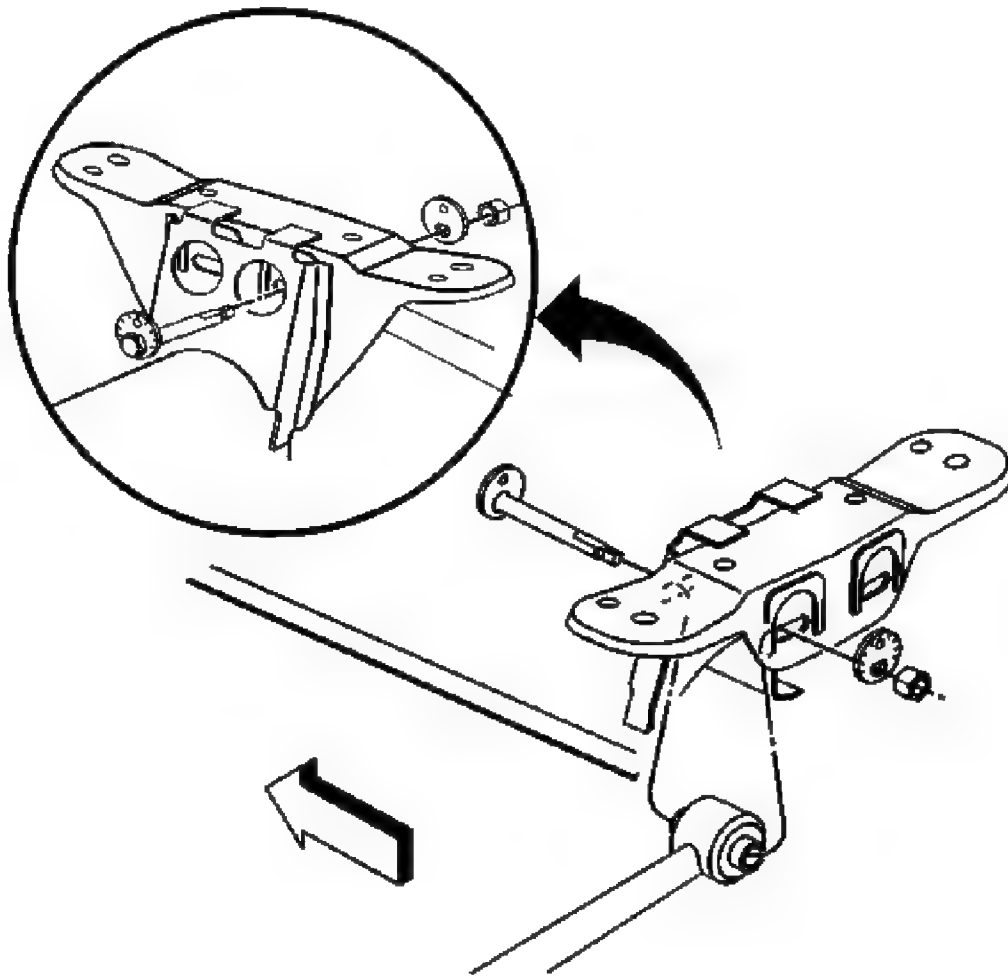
Loosening Inner Adjustment Link Retaining Nut
